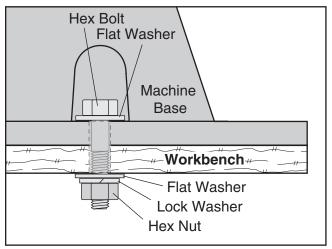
Through mount using nuts and bolts for maximum rigidity when grinding.
